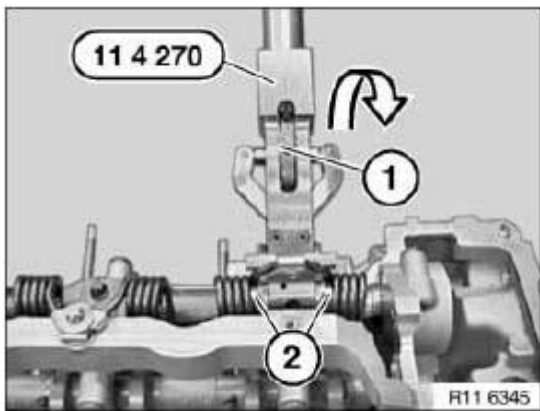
Identifying Special Tool (11 4 270), Screw And Bearing Pins
